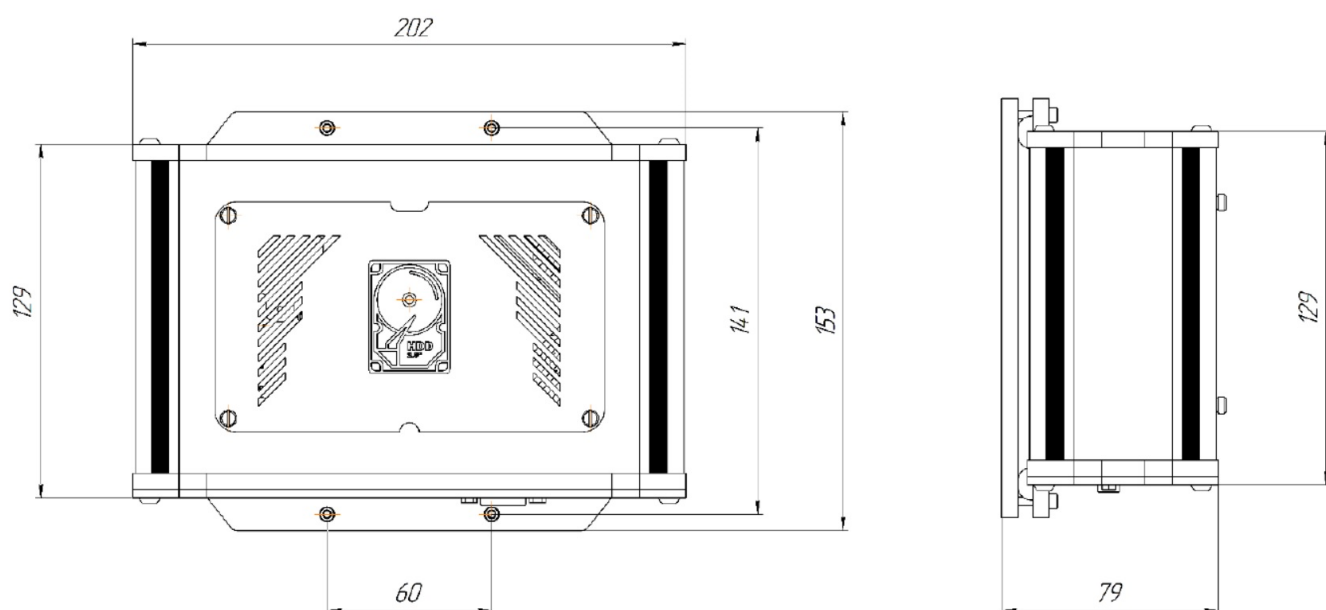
Overall dimensions of the DEL-150V3-M0 Video Recorder
